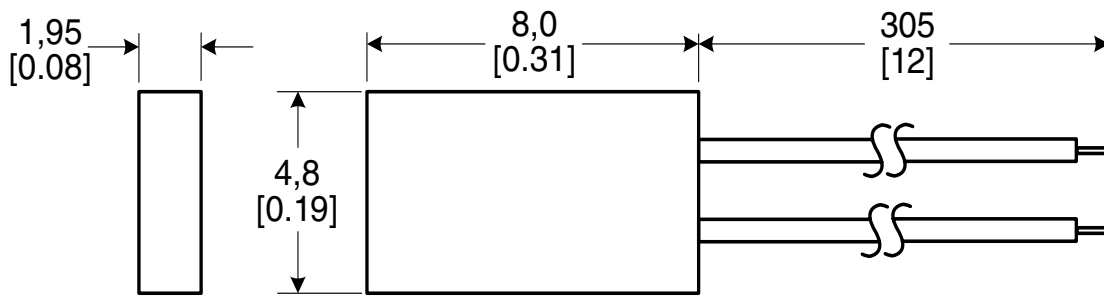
Mounting Dimensions (For reference only. mm/[in].)
